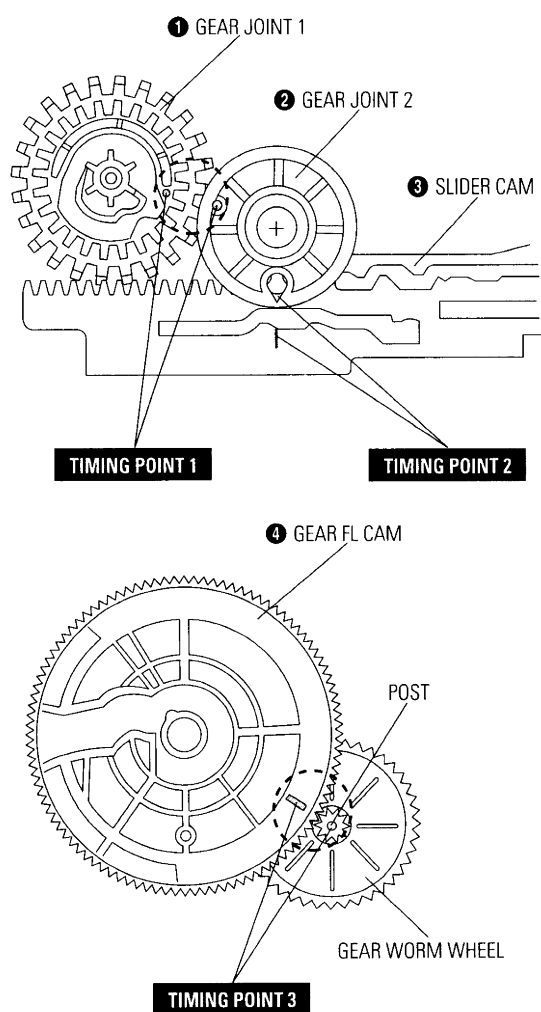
Assembly of Gear FL Cam, Gear Joint 1, 2
